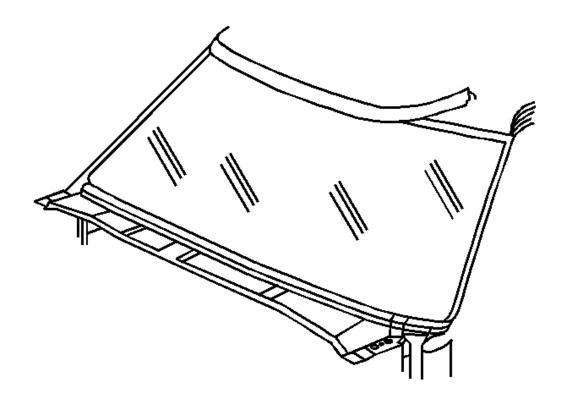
View Of Window Reveal Molding Courtesy of GENERAL MOTORS CORP.
